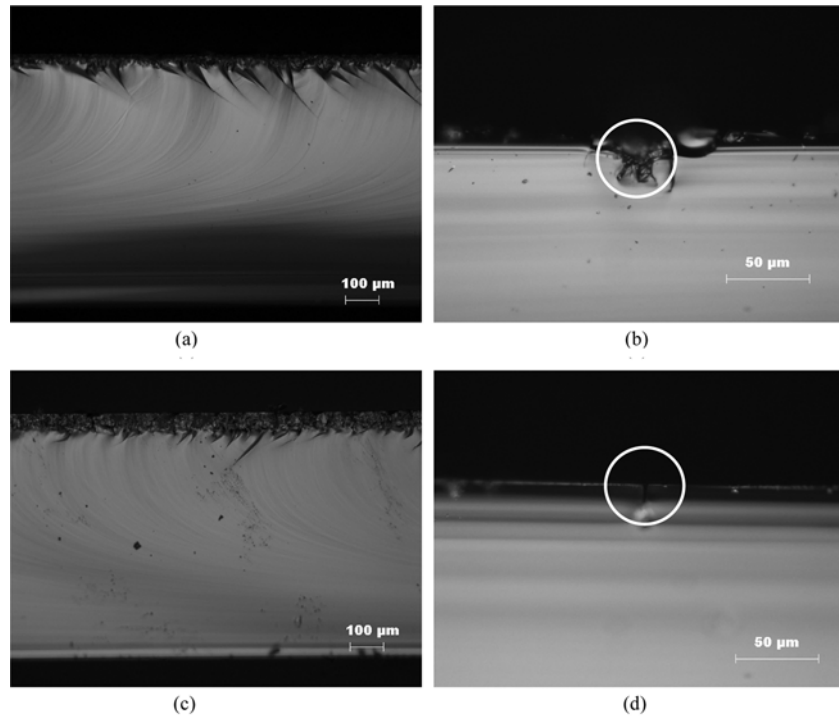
Cross-sectional view of mechanical breaking after femto-second laser scribing (glass thickness = 0.7 mm, scanning speed of 5 mm/s (a), side view of the 5 mm/s speed groove (b), scanning speed of 20 mm/s (c), side view of the 20 mm/s speed groove (d)).
